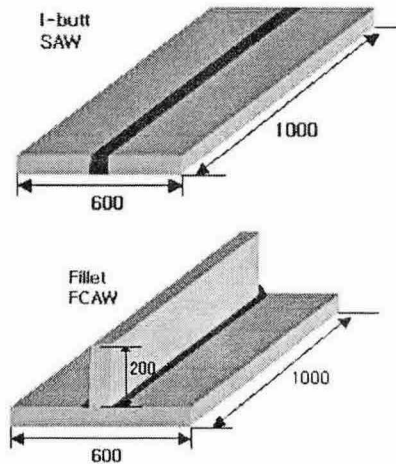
Welding specimen for deformation test[unit : mm]
